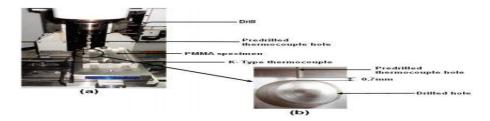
Experimental Setup and enlarged view of the predicted thermocouple hole and drilled hole
